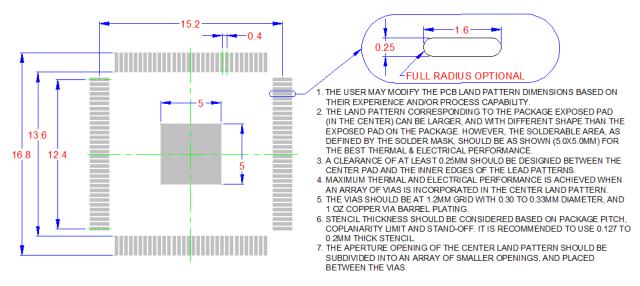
128-XVTQFP Recommended PCB Land Pattern
